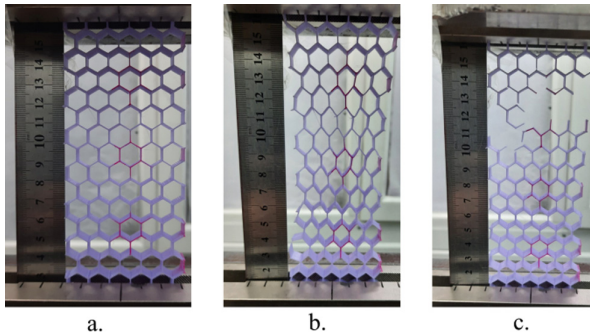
Tension tests of honeycomb: (a) – sample before tension test; (b) – tensioned sample before fracture; (c) – fractured honeycombs
